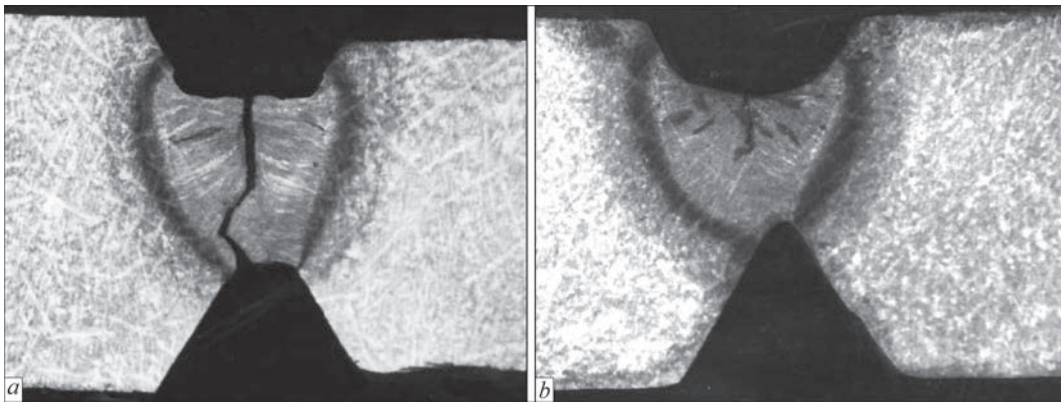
Solidification cracks in welds when welding samples of 25KhN3MFA steel using Sv-08KhN2GMYu wire: *a* — with a diameter of 3 mm; *b* — 2 mm
